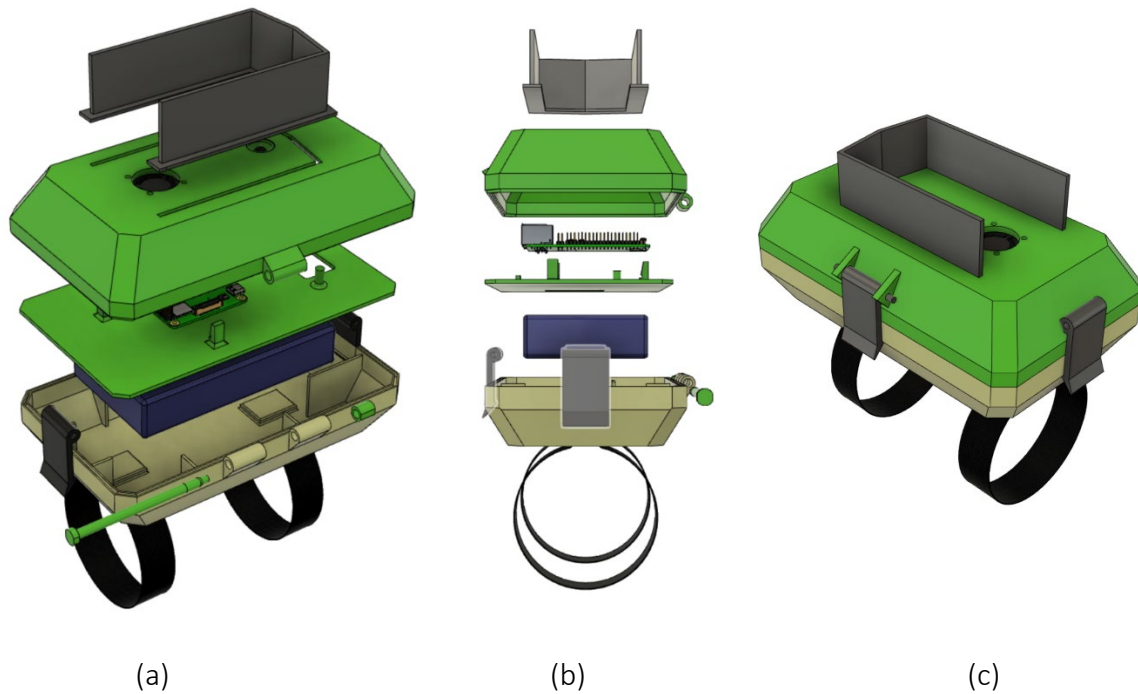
(a) exploded isometric view of case assembly; (b) exploded profile view of case assembly; (c) final assembly of traffic counter case assembly.
